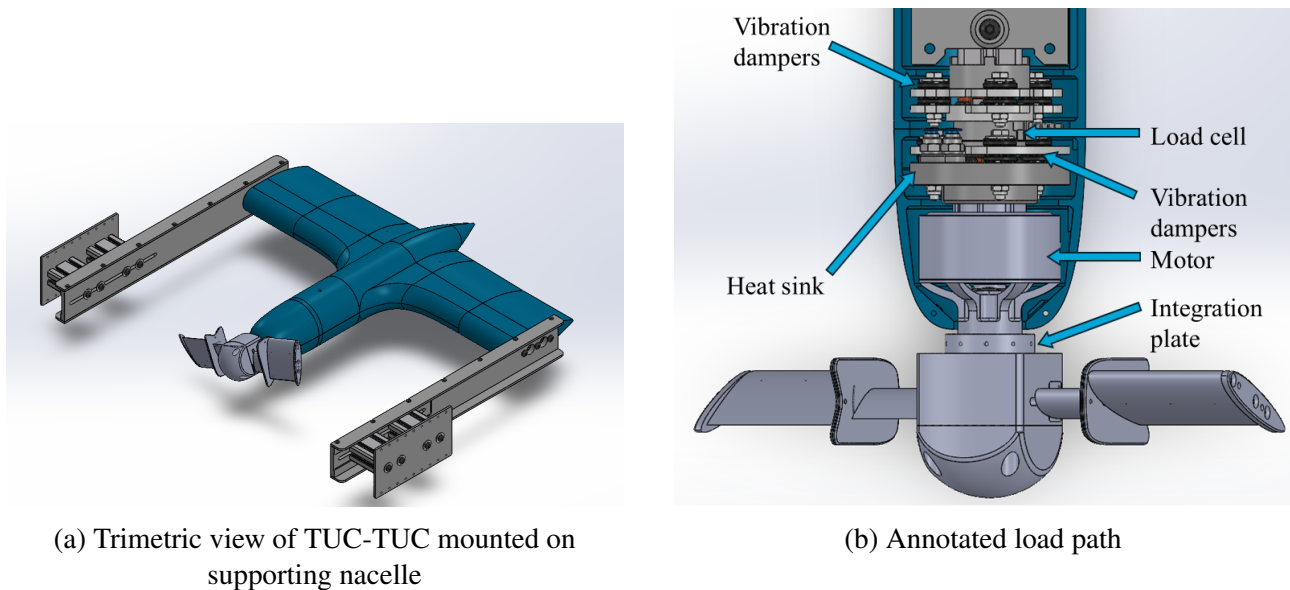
Trimetric view and annotated load path view of the TUC-TUC rotor system.
